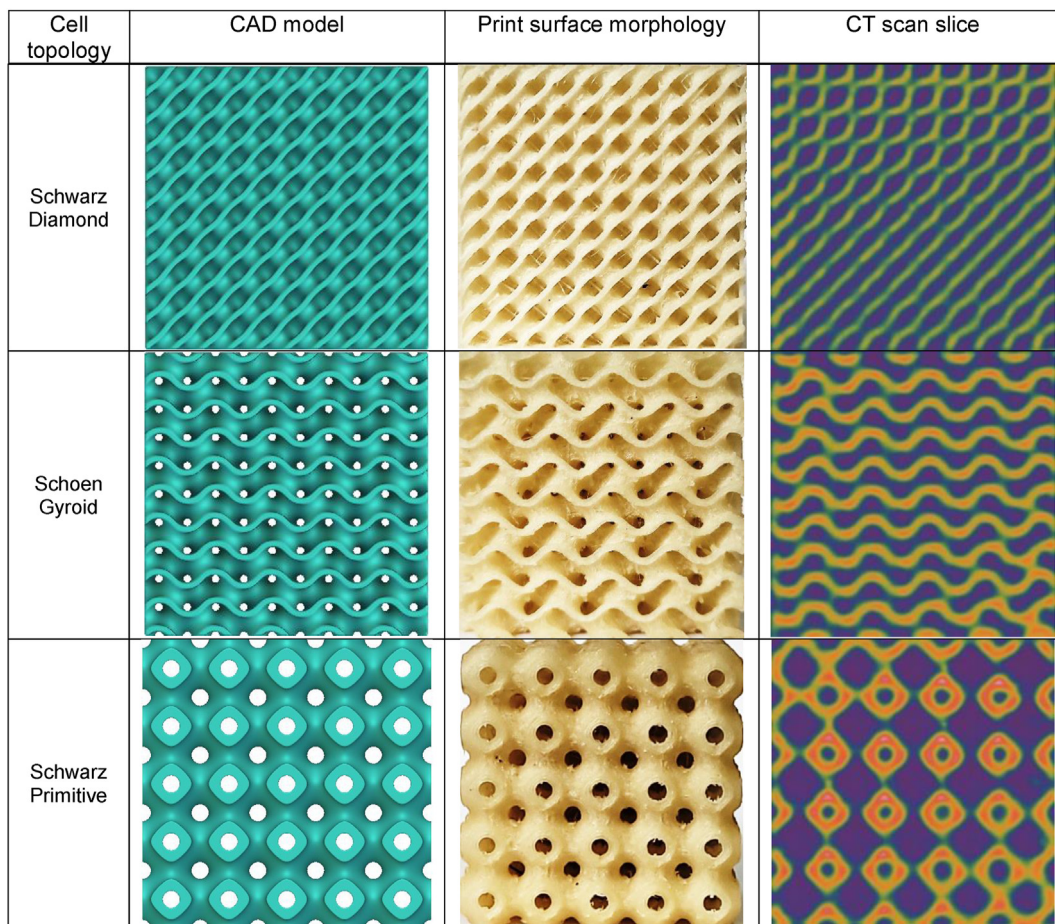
Comparative view of printed parts: CAD design model representing the build FDM prints with corresponding CT slice image.
